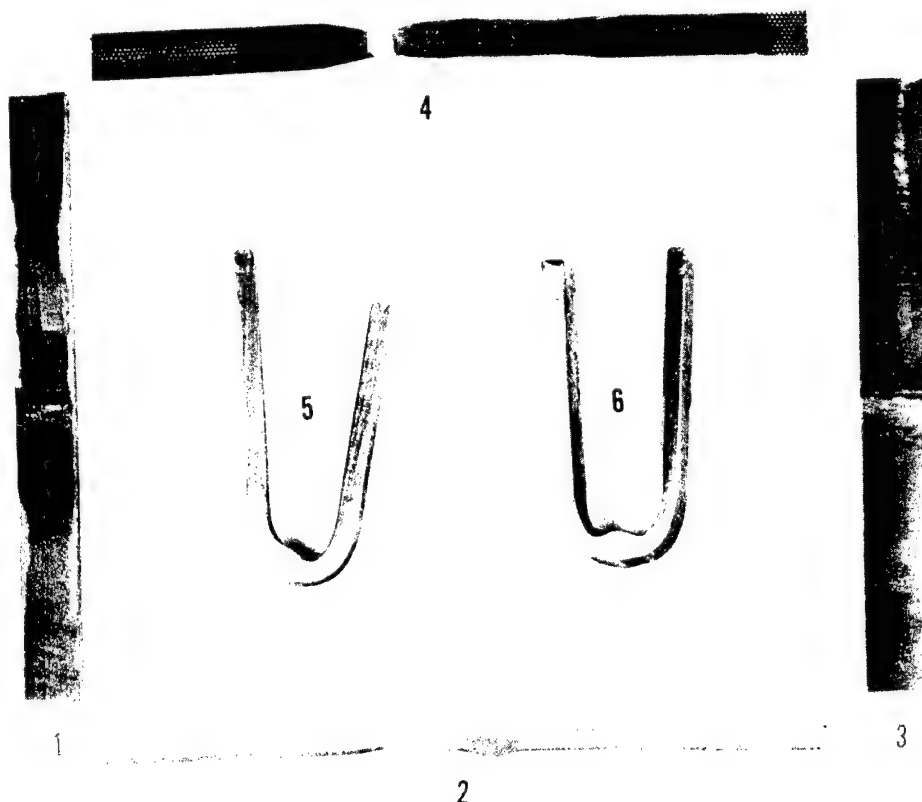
Physical test specimens of 8-5/8-inch OD Grade B seamless steel pipe having 5/16-inch wall joined employing the experimental solid phase girth welder. 1 and 3 are sections showing inside and outside of pipe through weld zone; 2 and 4 are tensile test specimens which failed at 68,600 psi stress, and 5 and 6 are bend test specimens.
